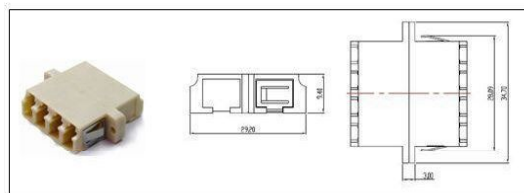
LC SC Footprint Quad Adaptor Appearance & Dimension
